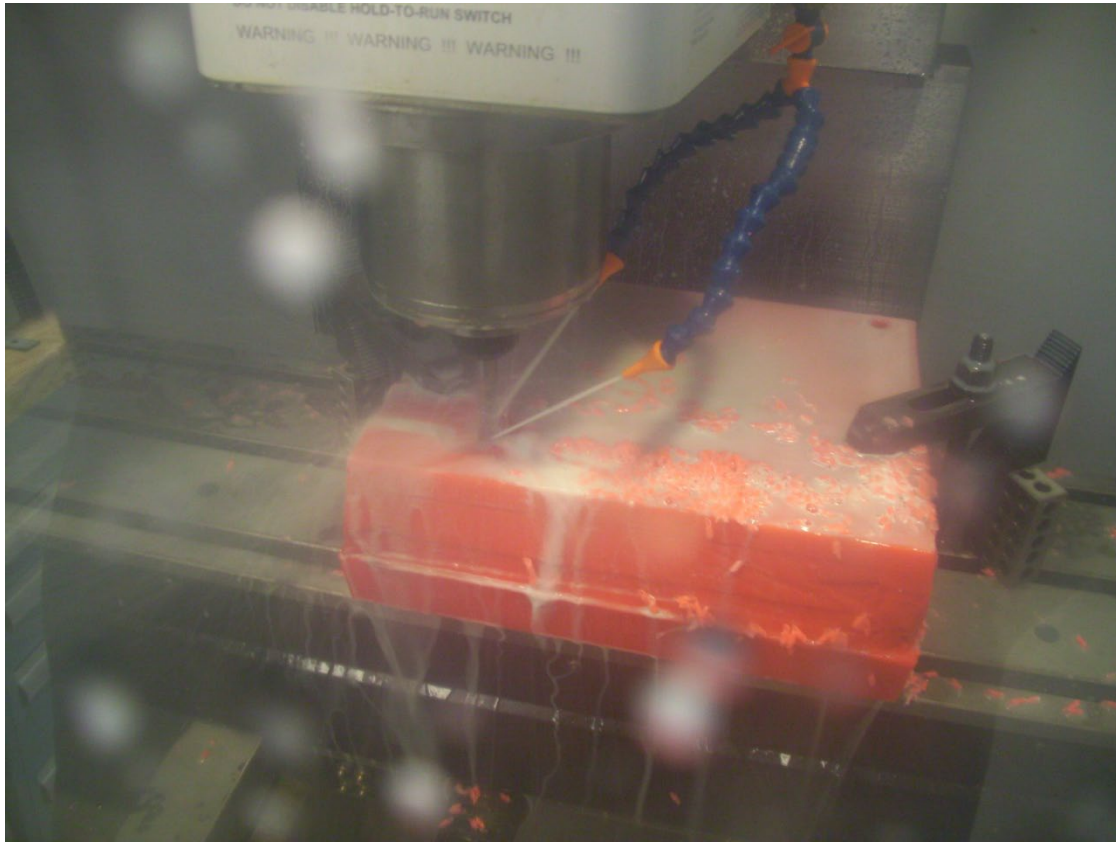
Image of the Haas CNC milling center during its first operation on the first setup. Note the clamping system used and the machined flat datum points.
